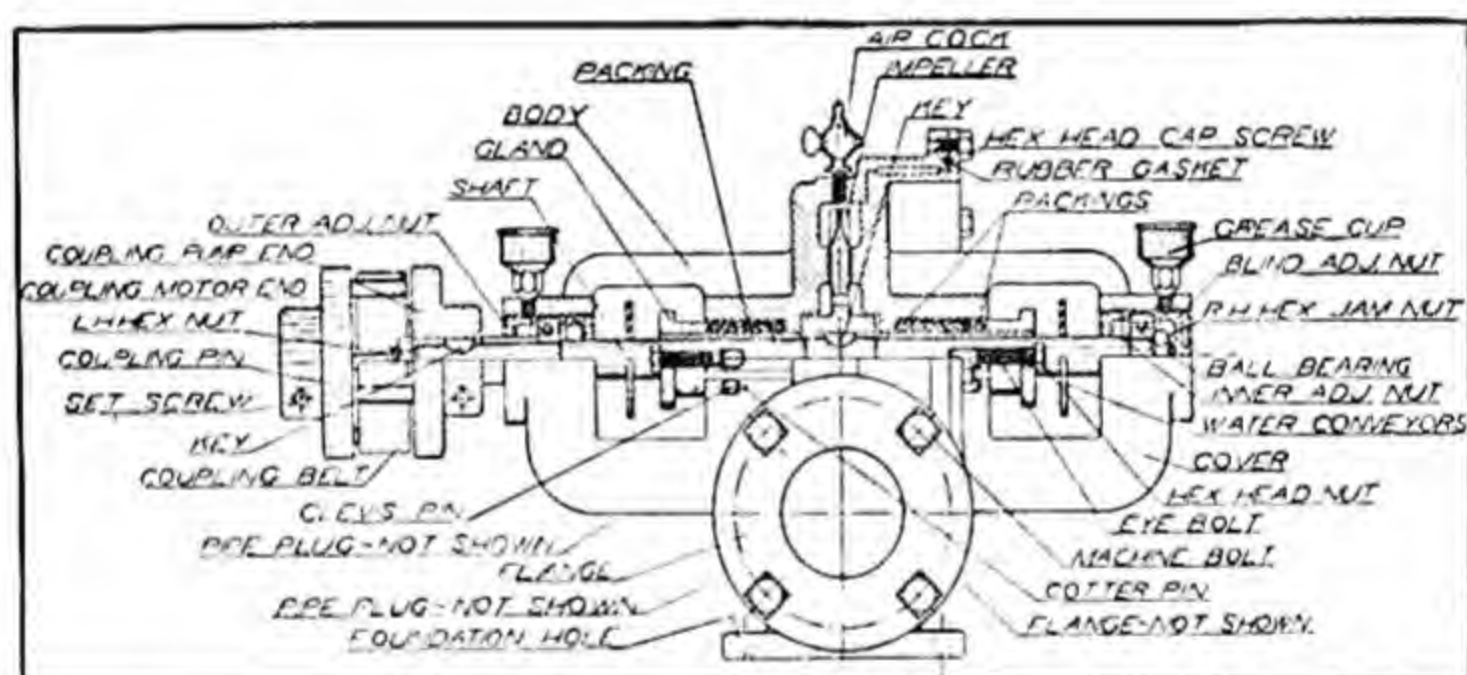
Sectional View of Westco Series of Single-Stage Pump.
